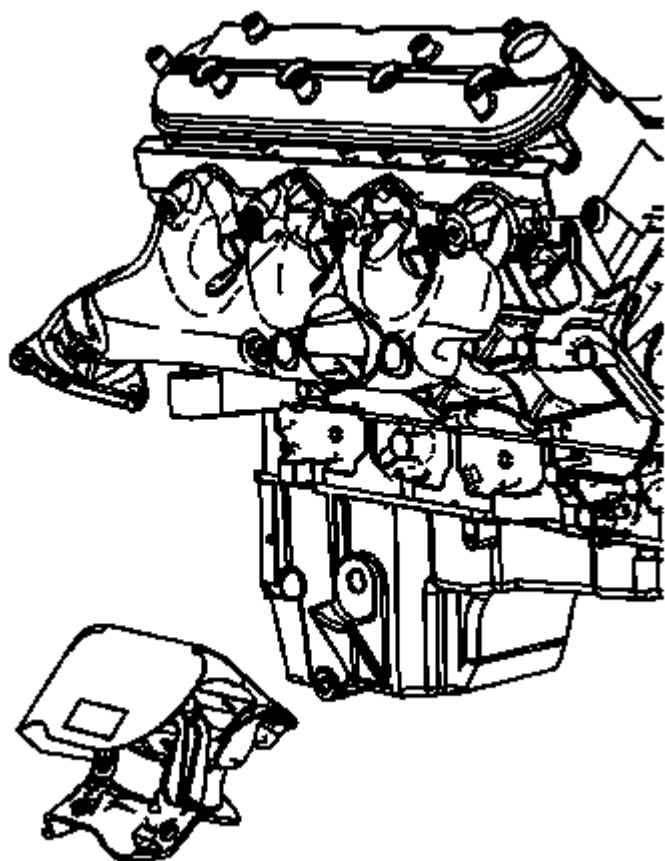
View Of Engine Mount To Frame Bolts
